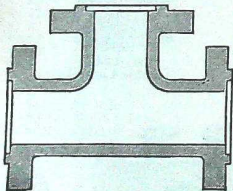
Steel Flanged Tee with Tongued Flanges
